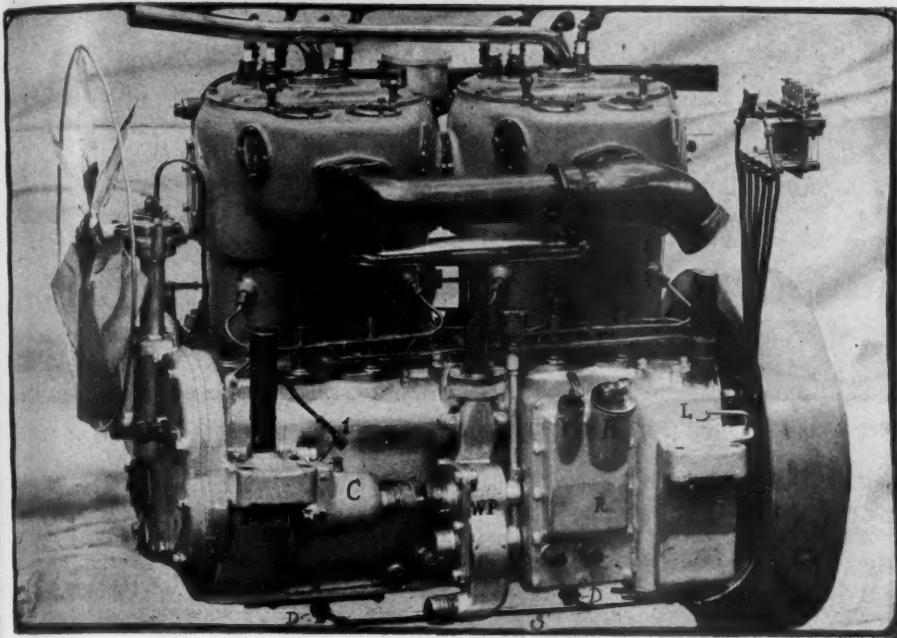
EXHAUST SIDE OF PEERLESS MOTOR
